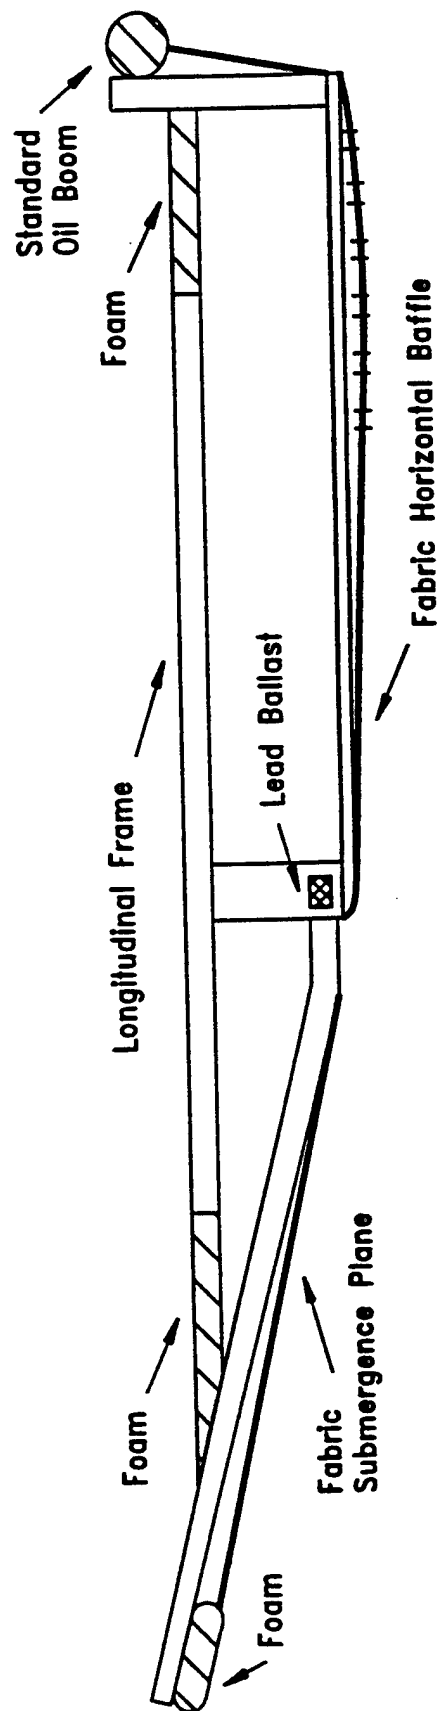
Construction schematic of the full scale, flexible barrier prototype section.
